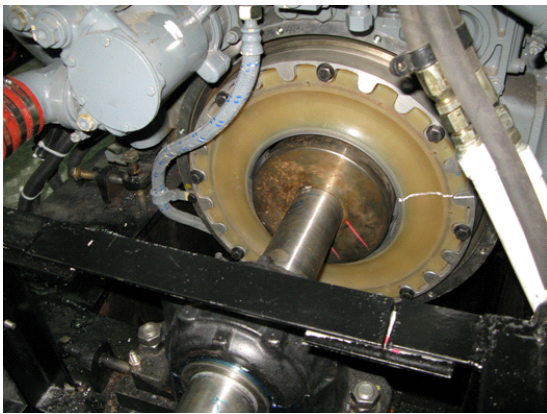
The flexible coupling A installed between engine and intermediate shaft
